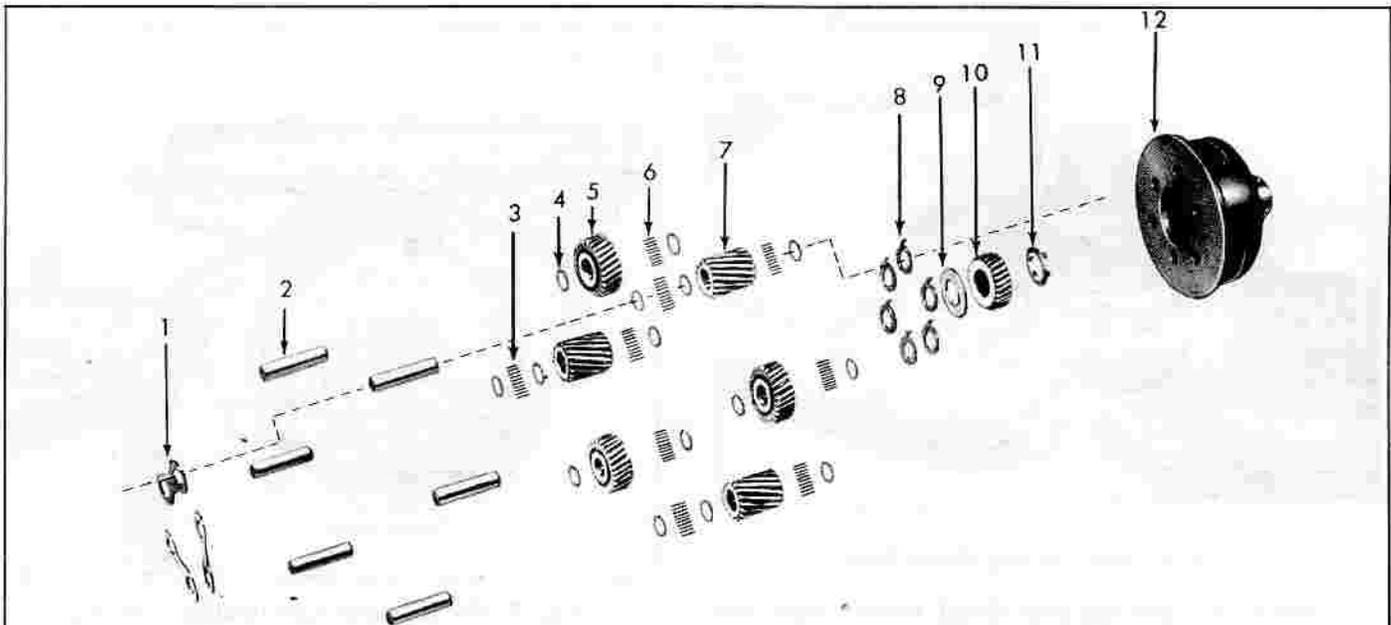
E-45—Planet Carrier Assembly—Exploded View
